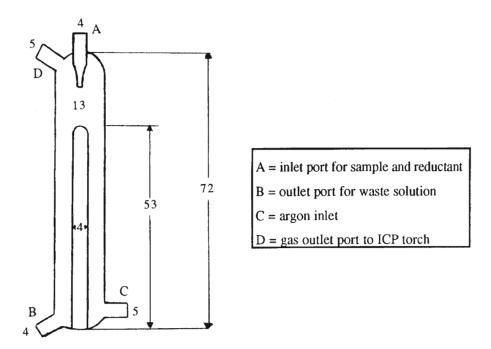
Modified Cetac design gas-liquid separator. All dimensions are in millimeters.
